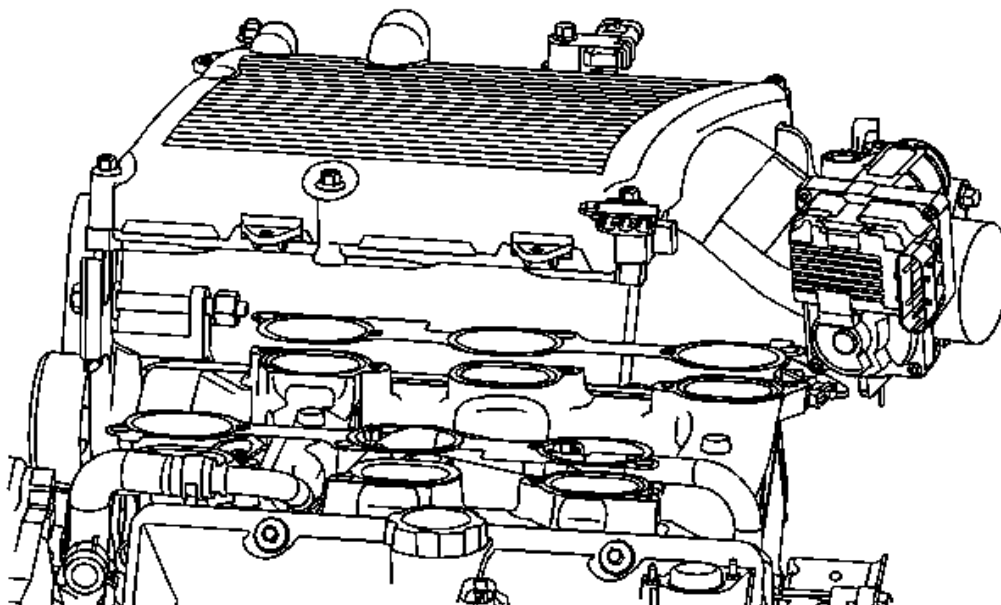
Identifying Upper Intake Manifold Bolts & Stud
